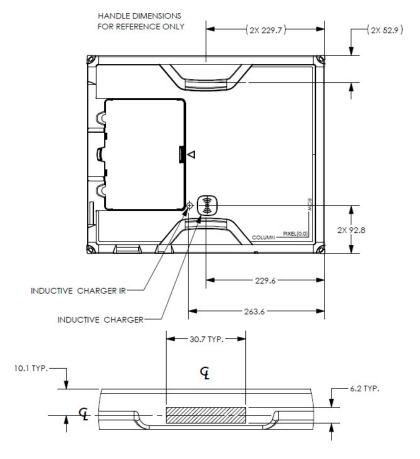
4336W-G5 X-ray Detector Dimensions in mm
